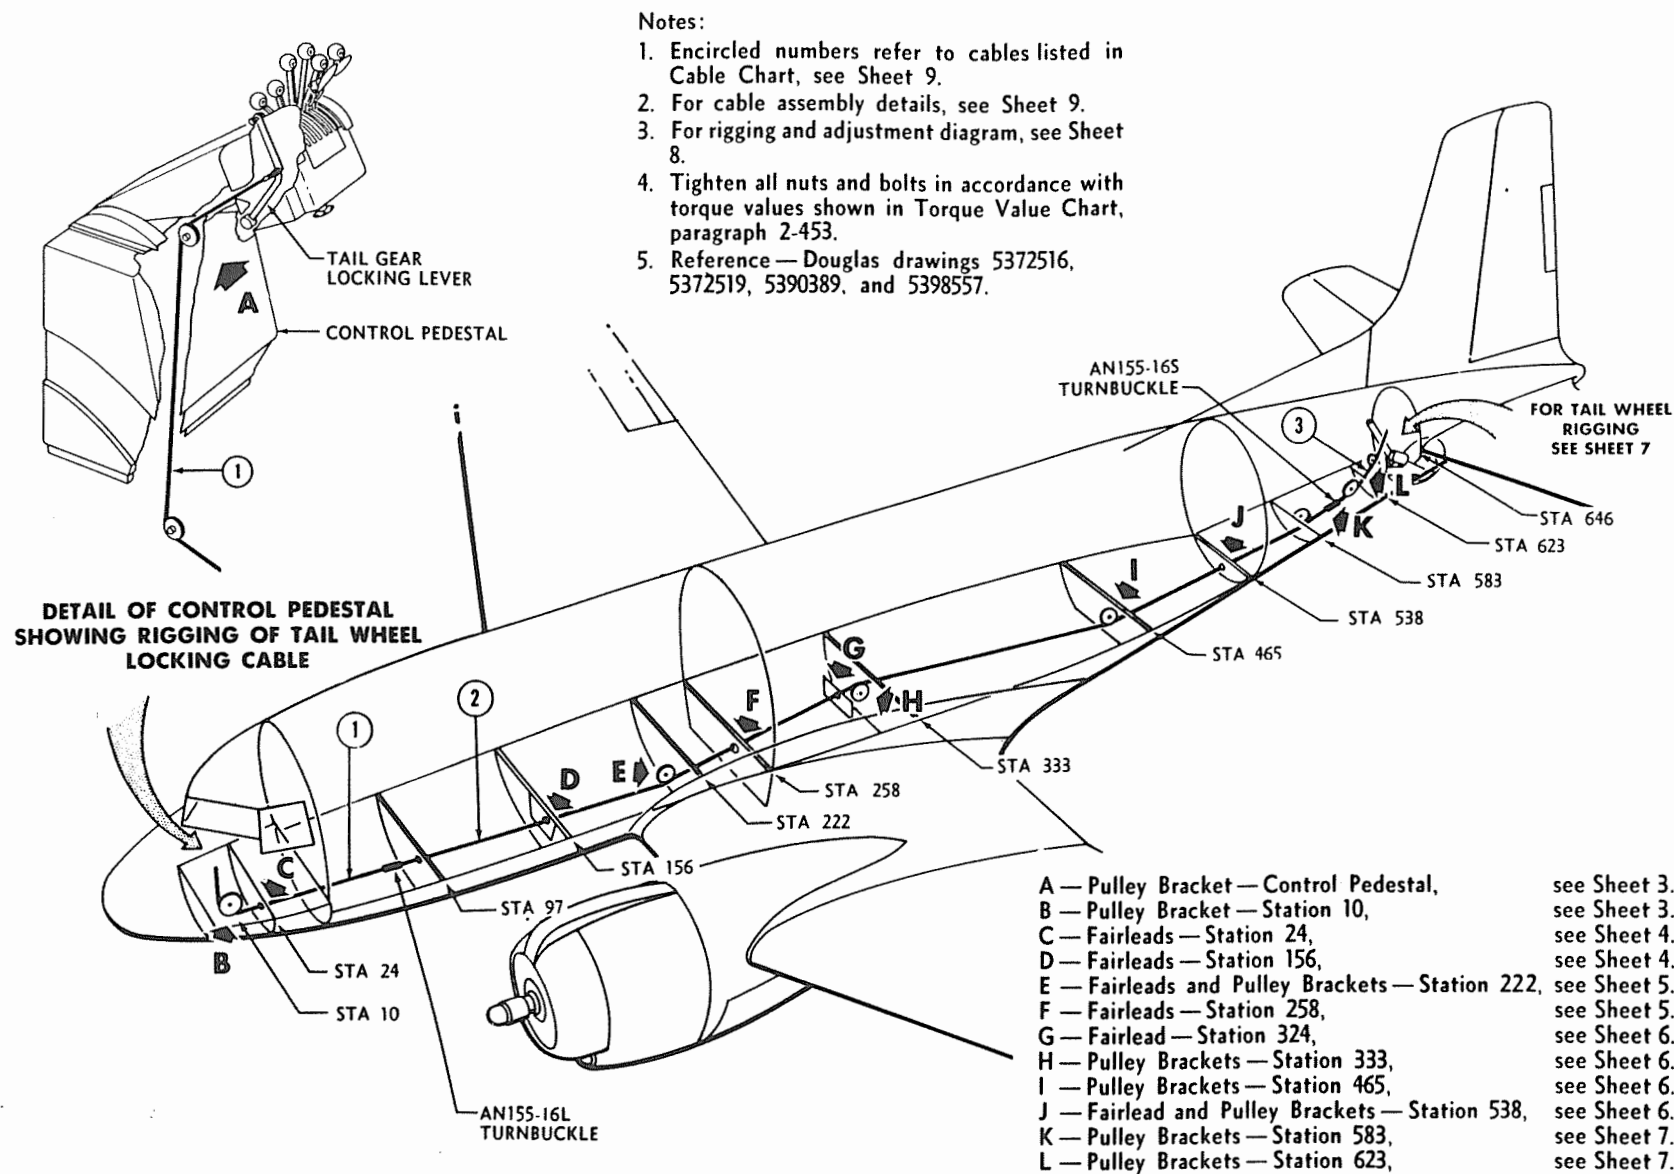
(Sheet 1 of 9 Sheets). Tail Gear Locking Control System — Key Drawing
